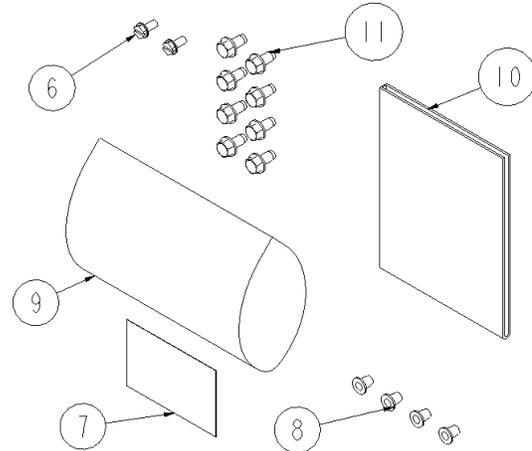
Parts included in the hardware kit of the type ADF dead front.
